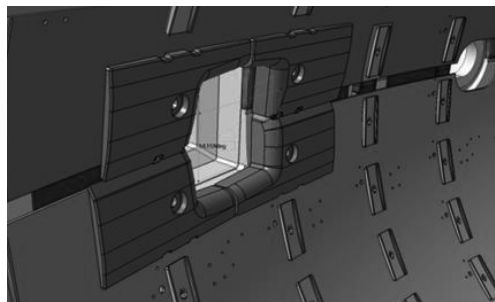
Detail of first wall graphite tiles around an equatorial port.
